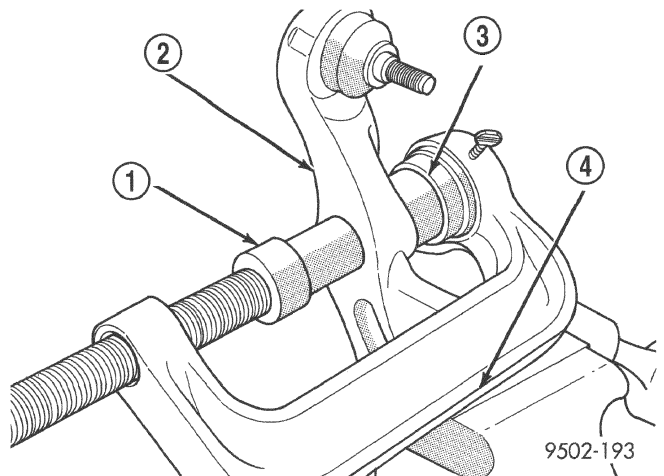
Installing Rear Bushing In Lower Control Arm
